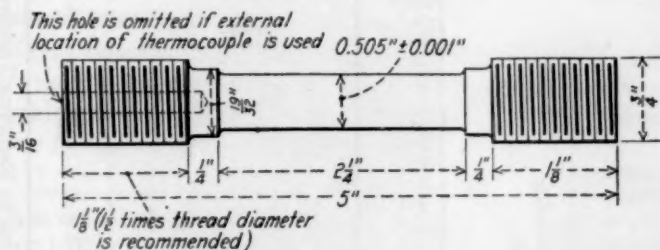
Test Specimen for High-Temperature Tension Tests.
